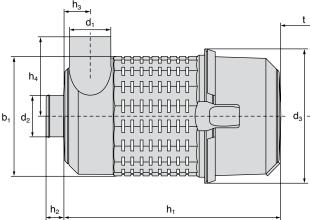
housing lower part with snap-fit closing (open 44 180 ...)
